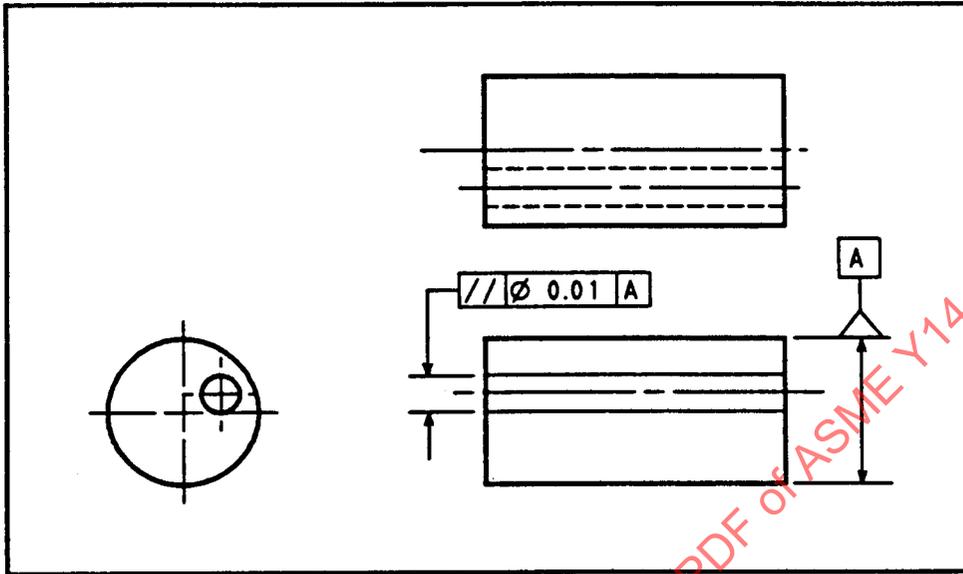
CYLINDRICAL PARALLELISM OF AN AXIS; PRIMARY DATUM AXIS; NO SECONDARY DATUM SPECIFIED
